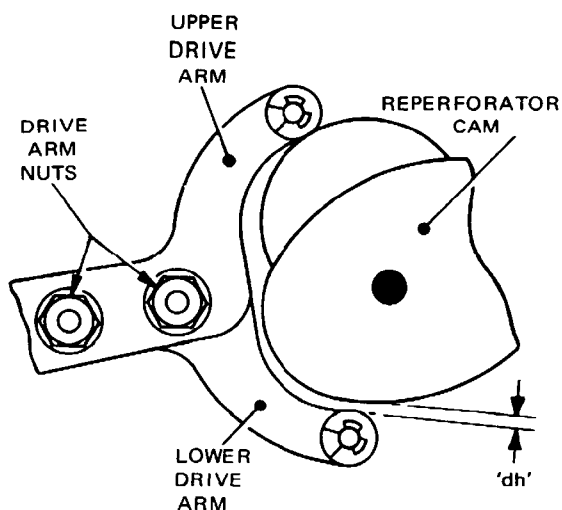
DRIVE ARM/CAM CLEARANCE
